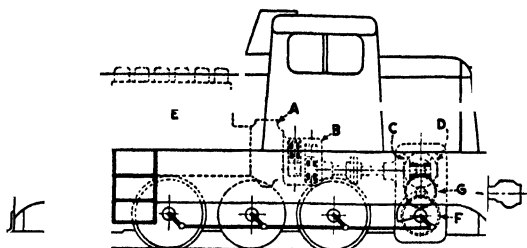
Hydraulic-torque drive (E = engine; A = converter; B = two-speed gear; C = reverse clutch; G = gears; and F = jack shaft).
